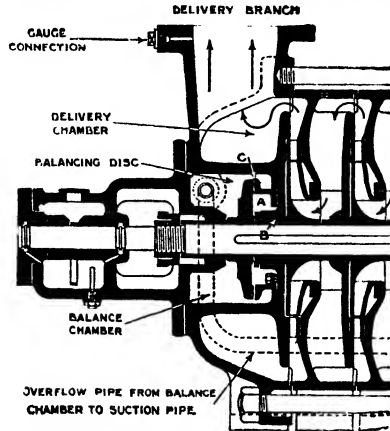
Delivery end of turbine pump (ring-type casing) showing hydraulic balancer.
